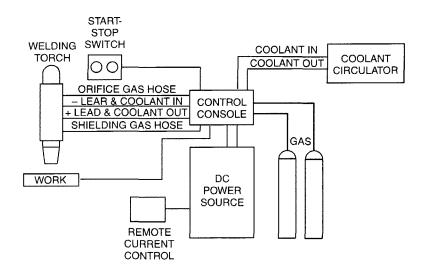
Typical Equipment for Plasma Arc Welding
